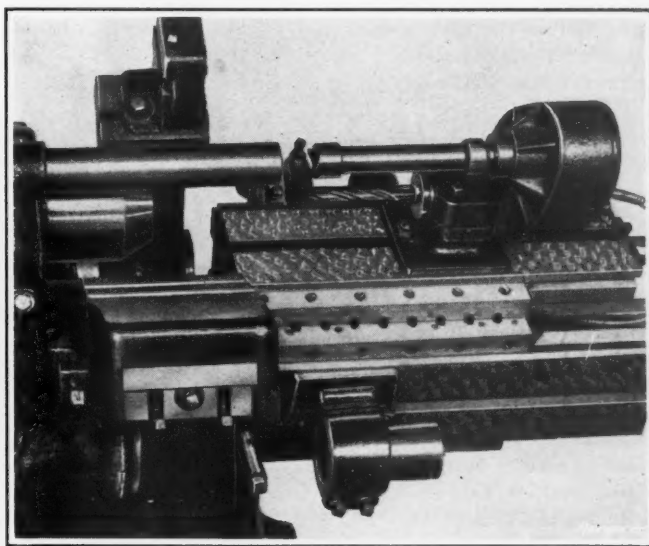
High-speed Drilling Attachment used on Gridley Automatic Turret Lathe
